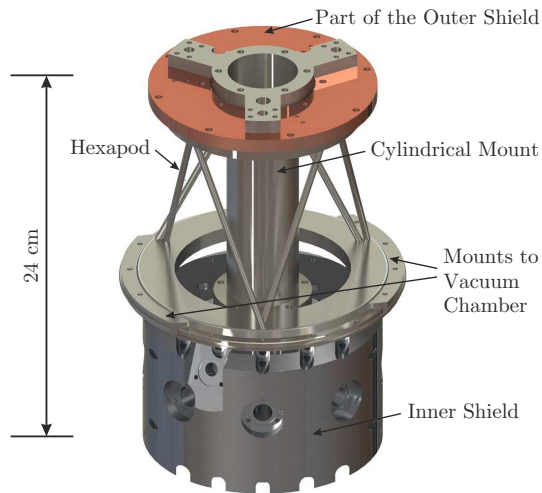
Sketch of the rigid mounting structure. A hexapod connects the vacuum chamber and the outer shield, and a cylindrical mount connects the outer and the inner shield.
